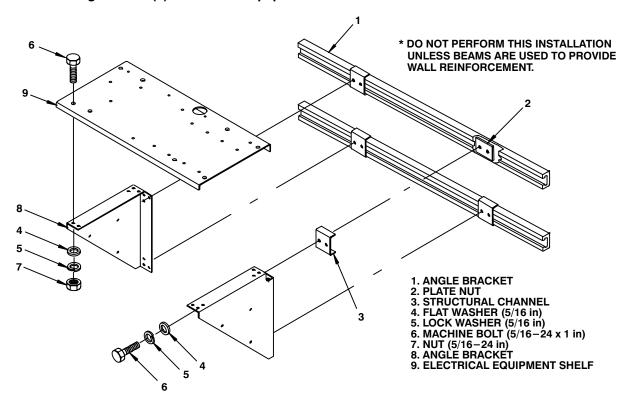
(5). Electrical Equipment Shelf Installation: Alternate Installation D
